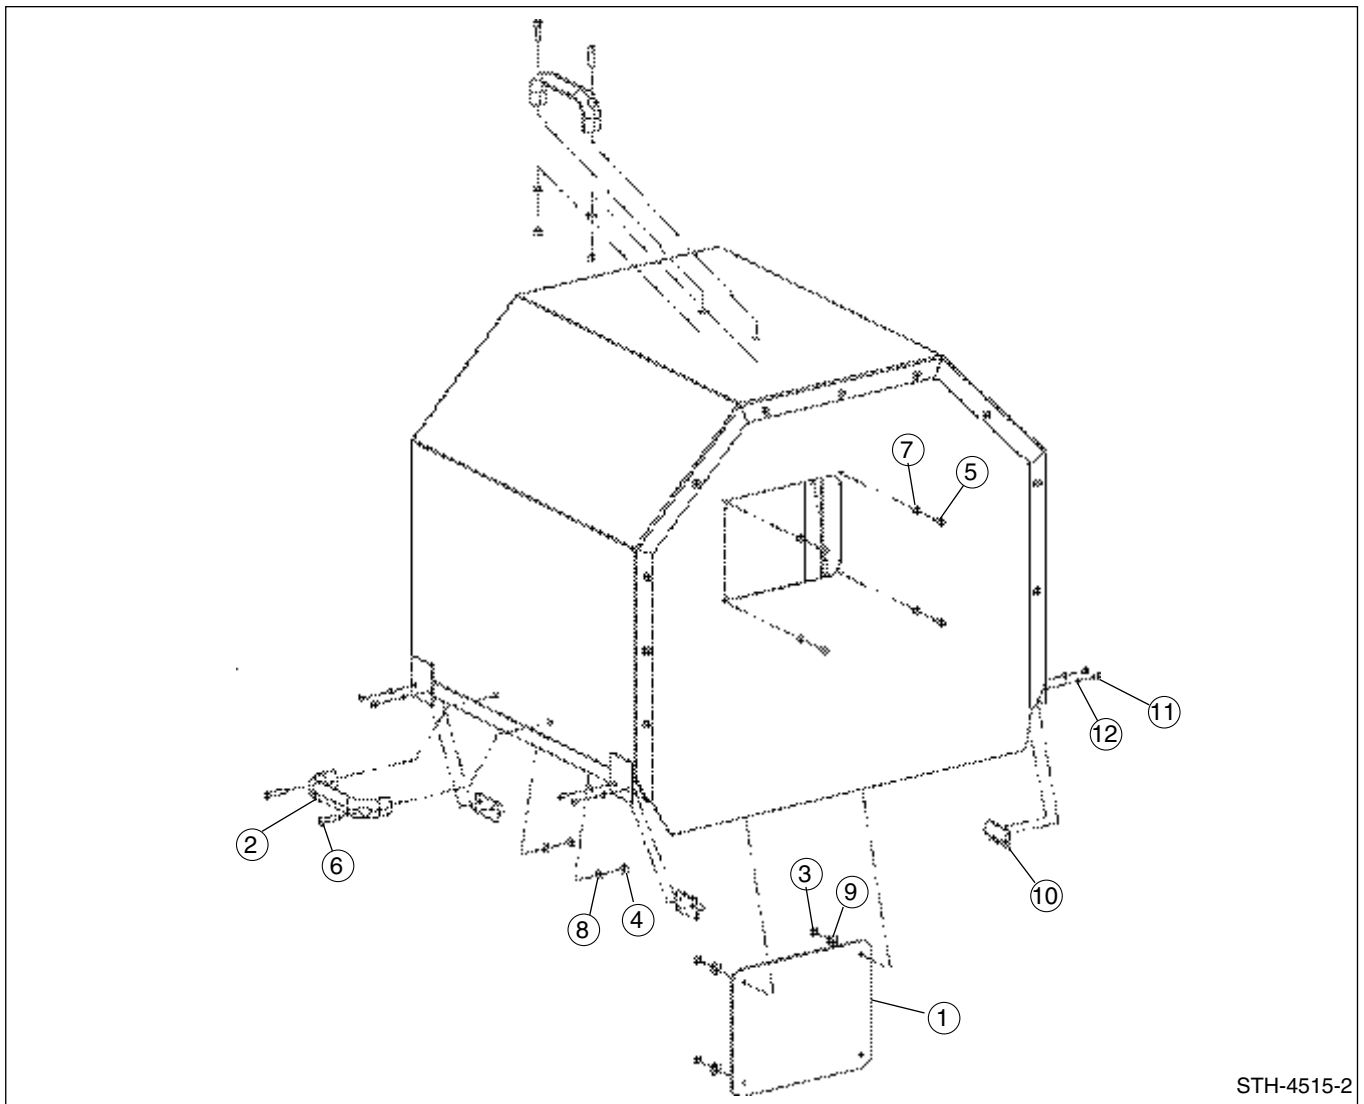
FIGURE L – REMOVABLE SPLASH GUARD ASSEMBLY, REAR (1 of 2)
